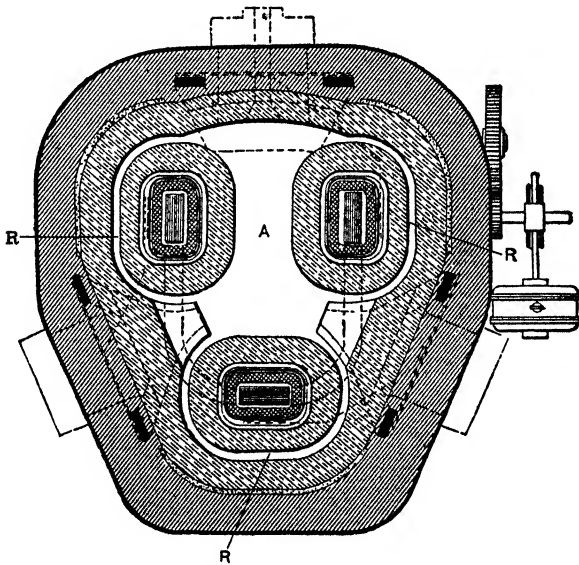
Horizontal section of Roechling-Rodenhauser furnace
